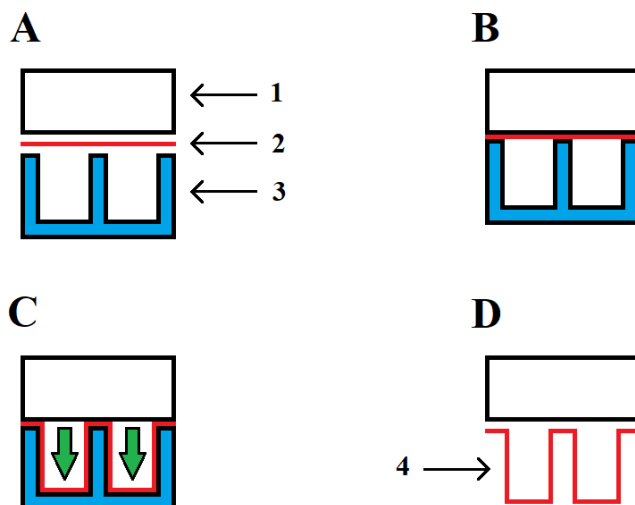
Schematic illustration of the thermoforming process for cup-shaped containers
